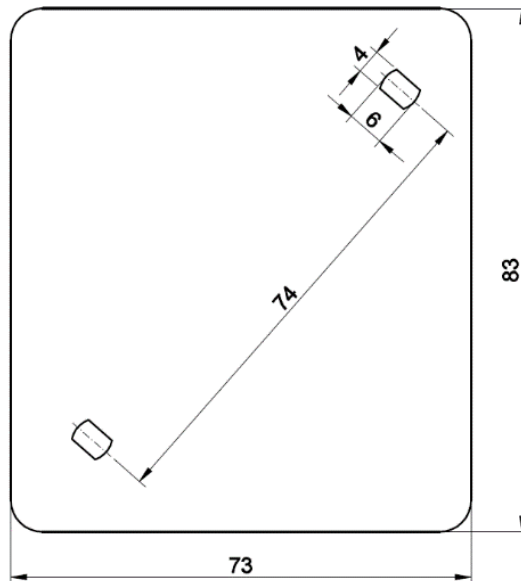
Dimensions and placement of installation holes of the ventilation button.
